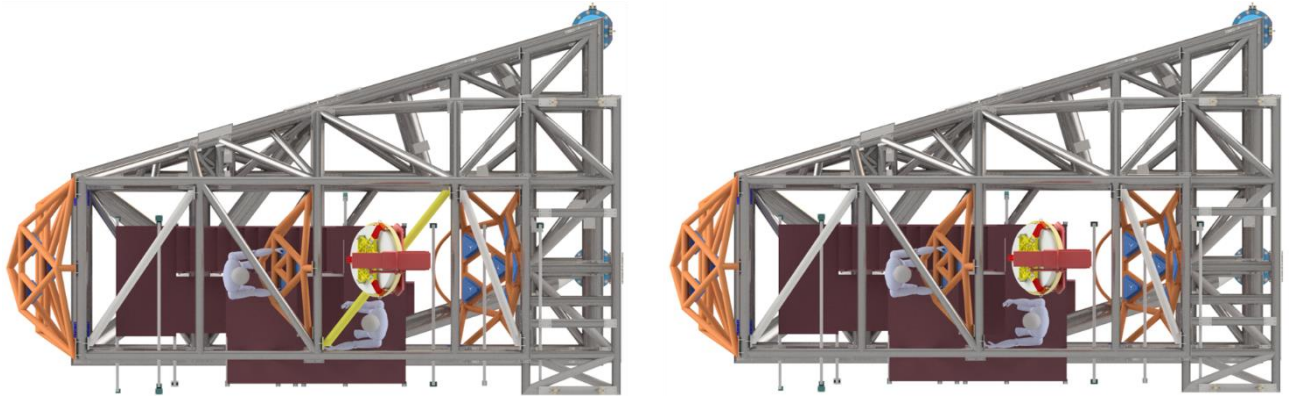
yellow beams shall be removed to allow handling accessing into MAORY main structure.
